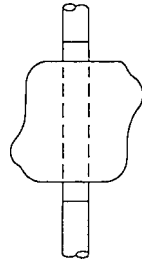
Visual Inspection of Tube Cuff
